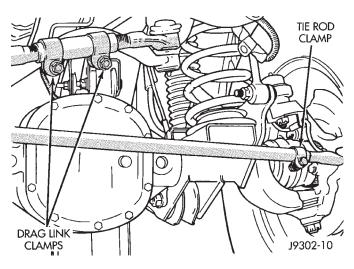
Tie Rod/Drag Link Clamp Bolt
